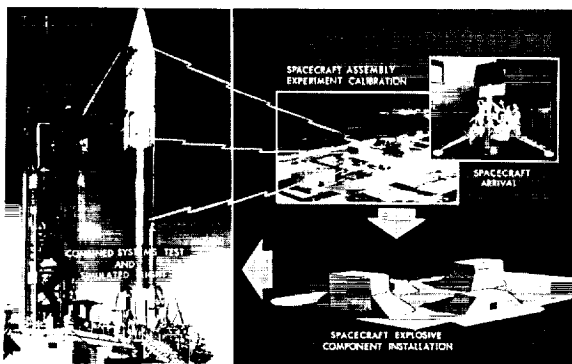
Prelaunch assembly and checkout, Cape Canaveral, Fla.
